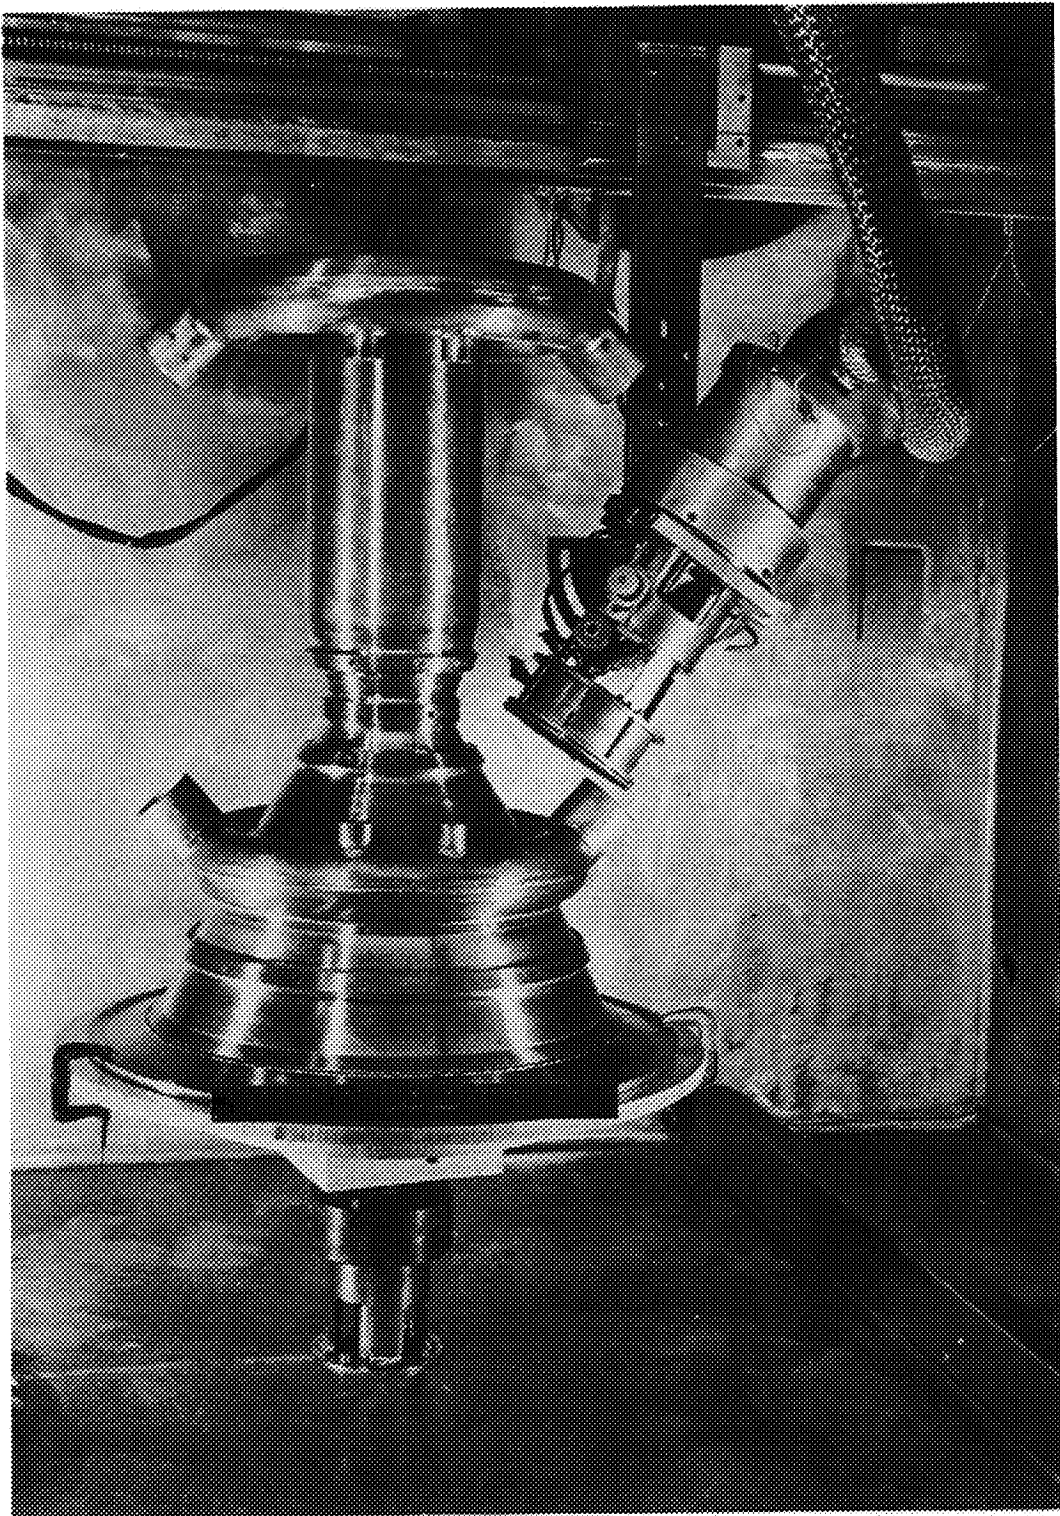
Electron Beam Welding Chamber, Inlet Manifold Forward Joint
